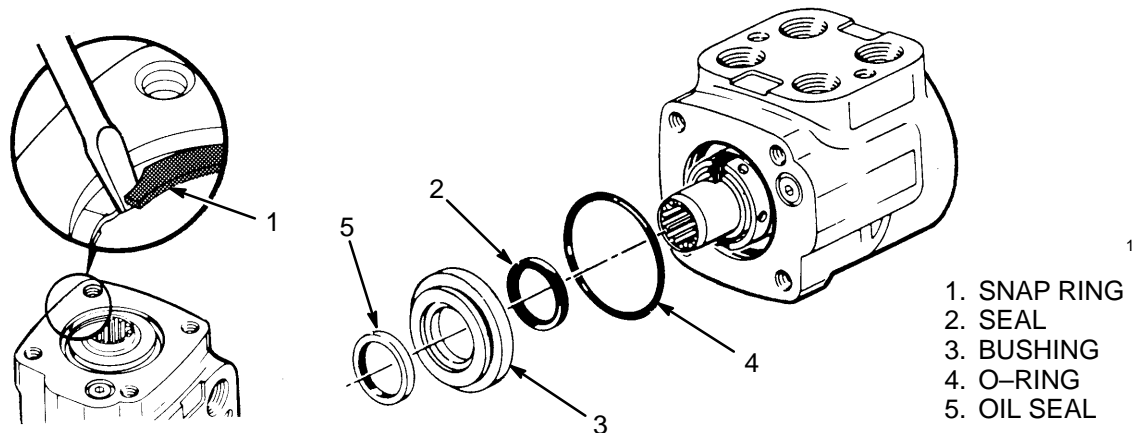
DISASSEMBLY OF THE STEERING CONTROL UNIT (2 OF 2)
